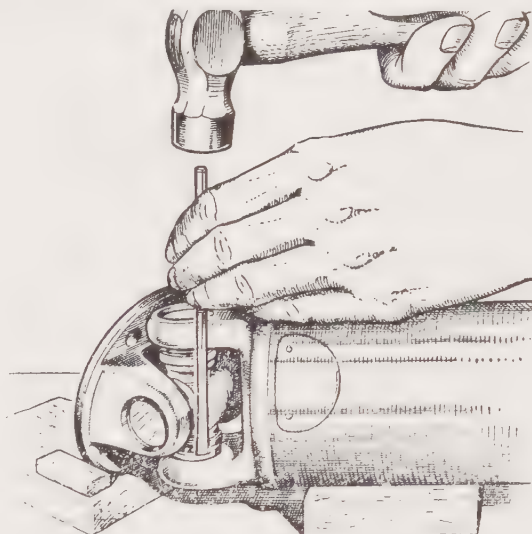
19 Use of drift for extracting bearing races if obstinate.
